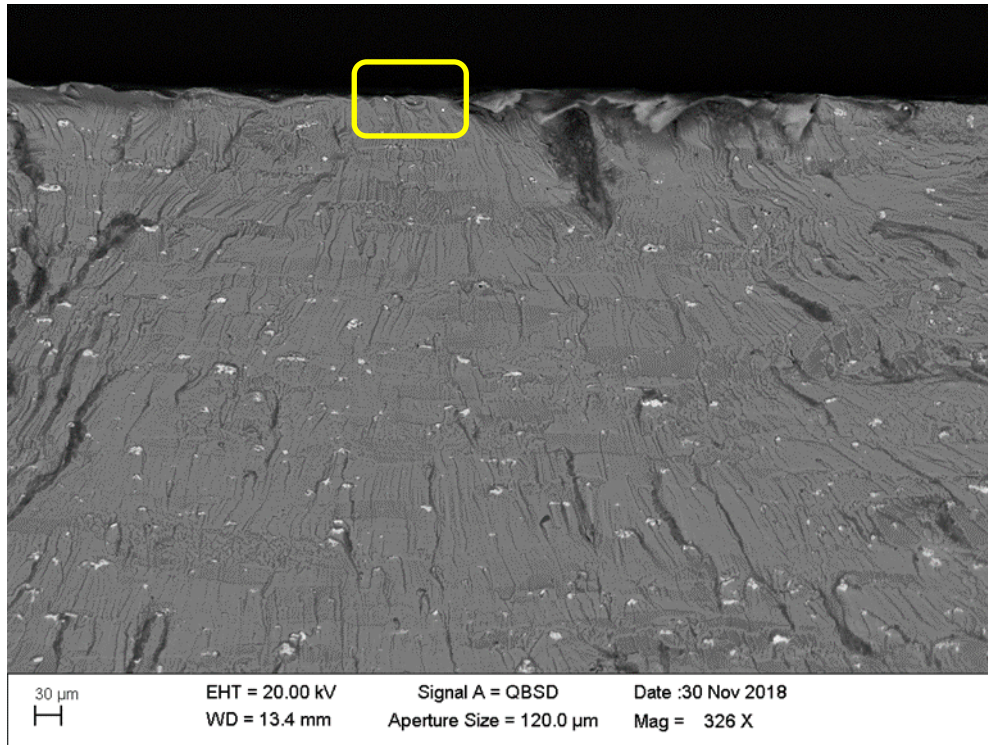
The fracture surface of the test specimen S8. There appears to be multiple crack nucleation points (one of which is highlighted) along the shot peened surface. Figure courtesy of Aalto University.
